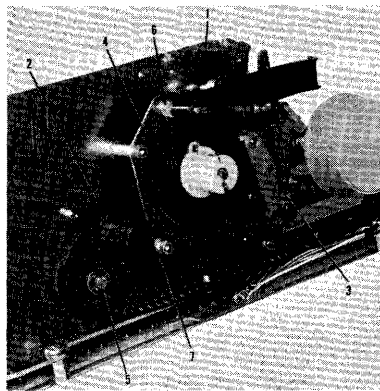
Frame Assembly (Left Side), TermiNet 300 Printer
